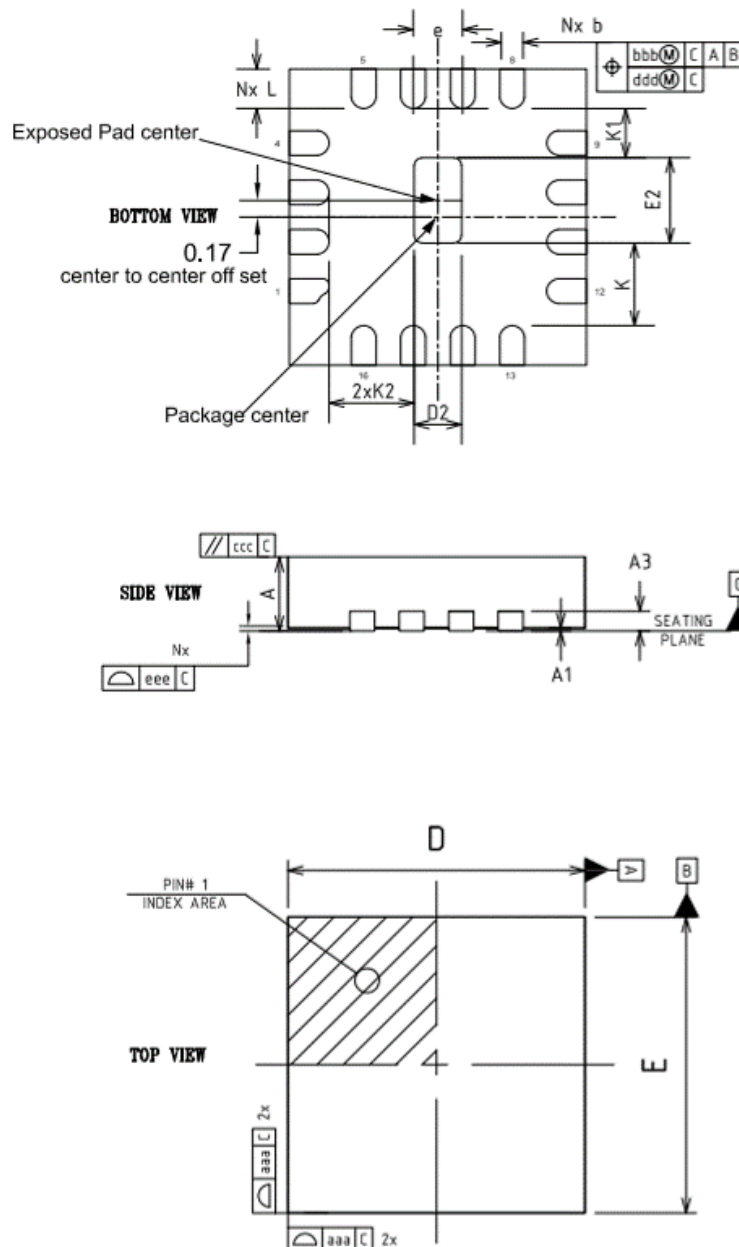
QFN16 (3x3 mm) package outline. Detail A
